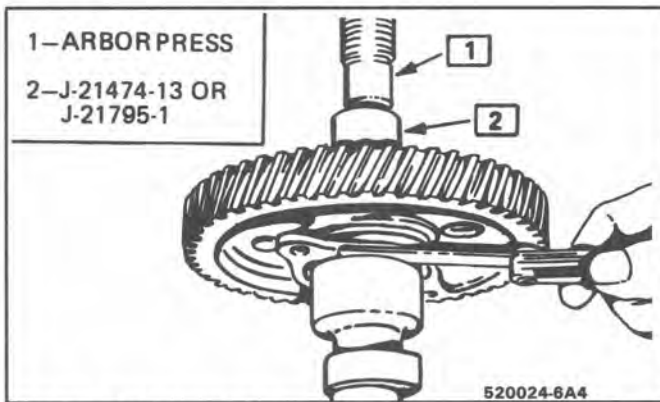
Camshaft Timing Gear/Thrust Plate End Clearance
